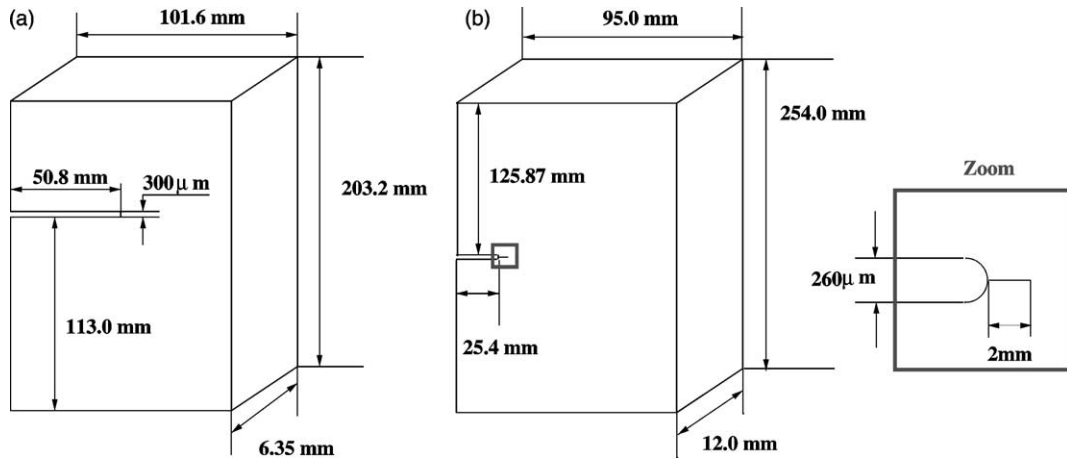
The configuration of single notch specimens (a) specimen one, (b) specimen two.
